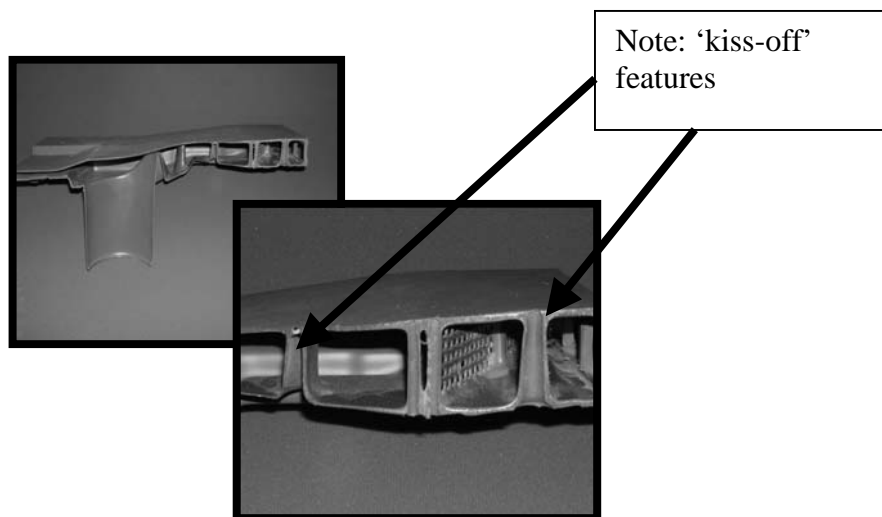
Cross-section of roof tile showing kiss-off detail
